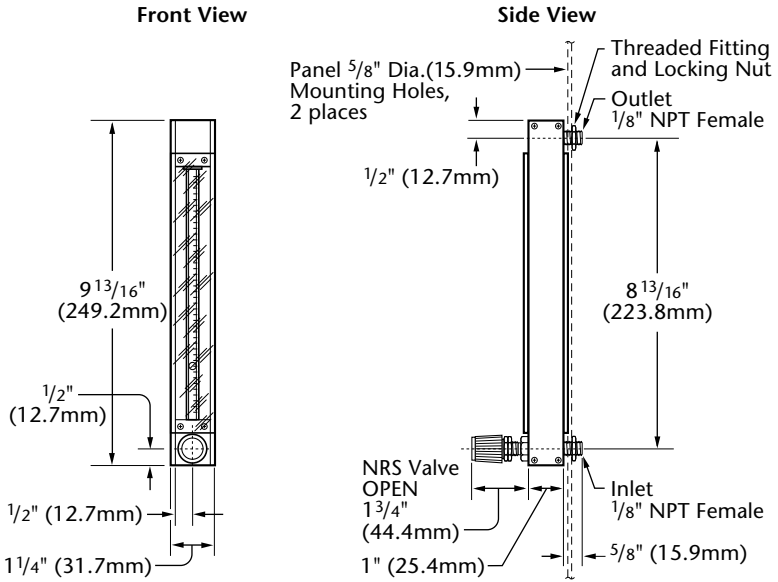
Series 150 Single Tube Flowmeter Dimensions
